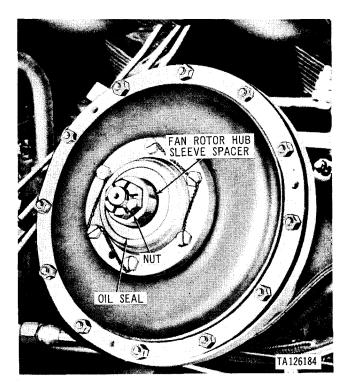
Front fan drive housing fan rotor hub sleeve spacer installed for leakage test.
